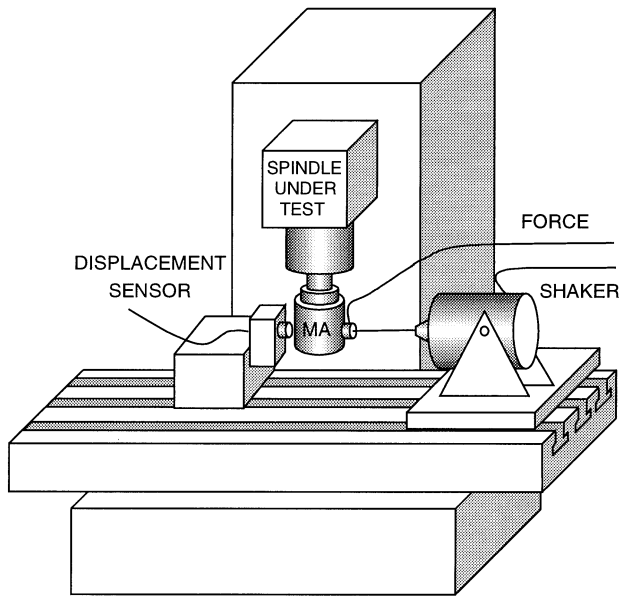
Test setup for measuring dynamic stiffness at speed on a milling machine.
